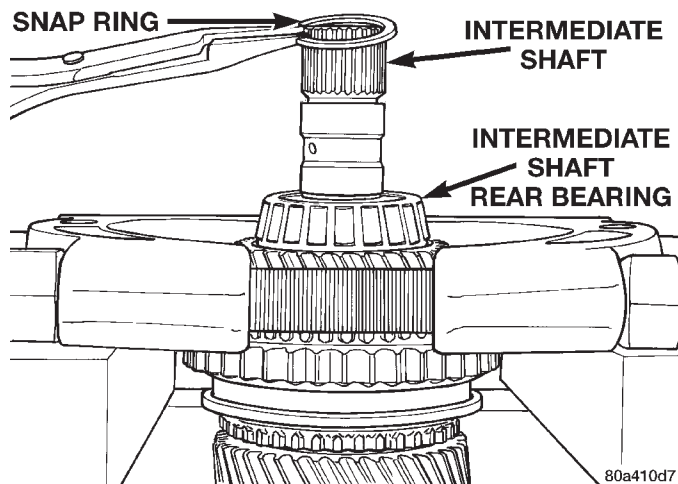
Intermediate Shaft Rear Bearing Snap Ring
